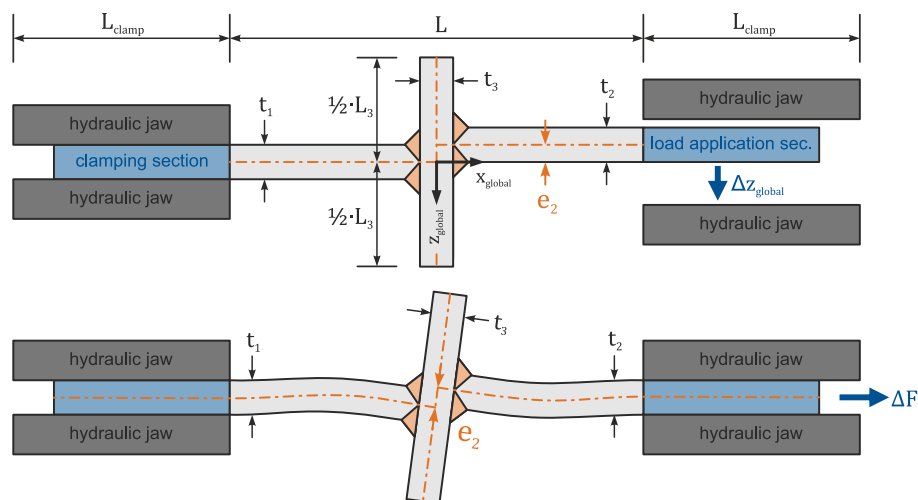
Cruciform joint geometry with axial misalignment before clamping process (top) and deformed shape after clamping process (bottom)
